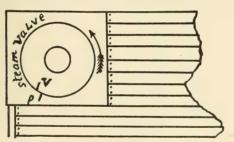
STEAM-VALVE OF CORLISS ENGINE.
